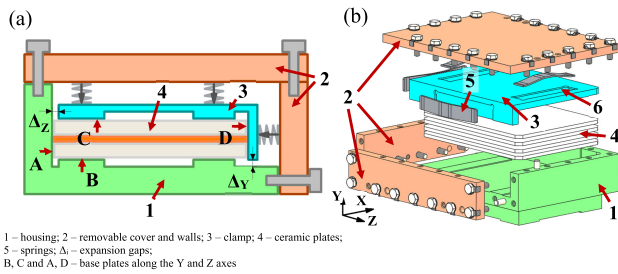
Ceramic parts fixation in the FMU prematch. (a) Schematic (YZ view). (b) Exploded view of the FMU RF prematch design.
